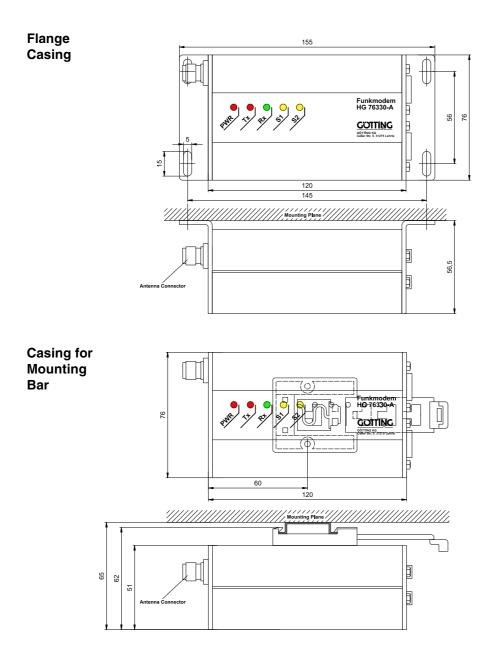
Comparison: Flange casing <-> casing for mounting bar (with housing dimensions)
